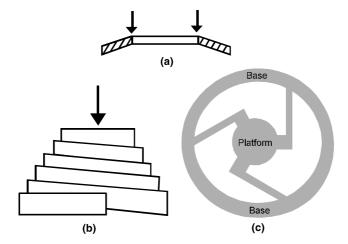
Examples of ortho-planar springs: (a) the cross-section of a Belleville disc spring; (b) the side view of a volute spring; (c) the top view of a spider spring.
